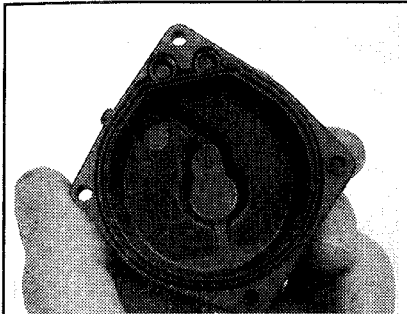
Inspect the inside of the float bowl for dirt and debris. Also check the condition of the rubber O-ring
